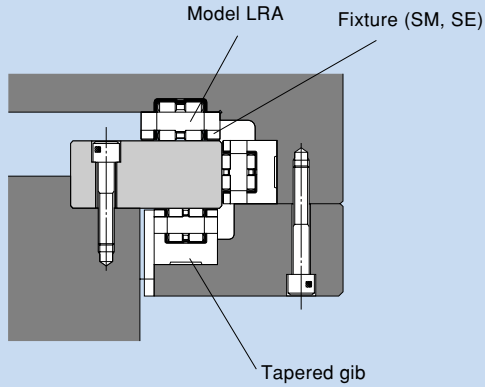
Methods for Adjusting the Clearance of the LM Roller
